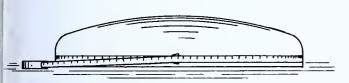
Dividing the Circumference into Four Equal Parts and Marking the Divisions
